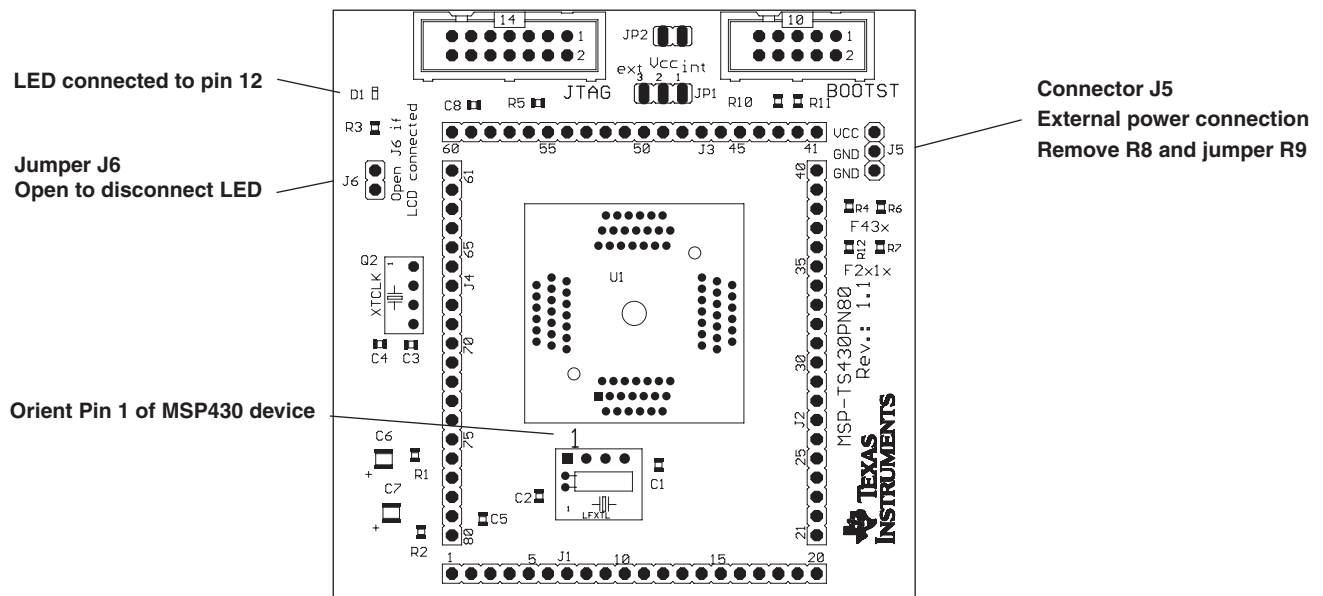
MSP-TS430PN80 Target Socket Module, PCB
